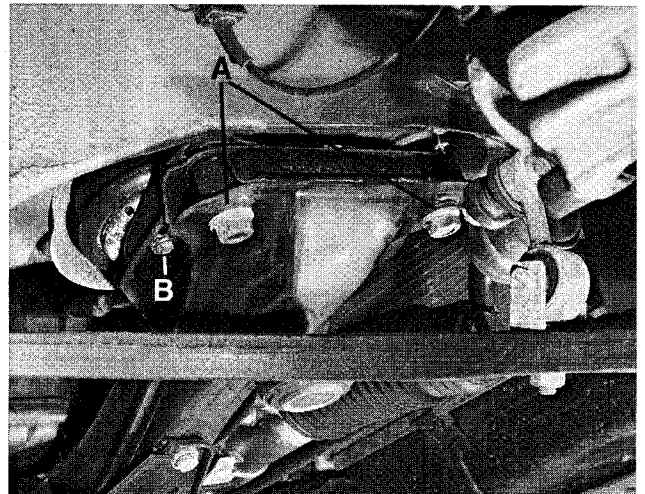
Suspension crossmember bolts (A) and lower engine mounting nut (B). Right side shown.
